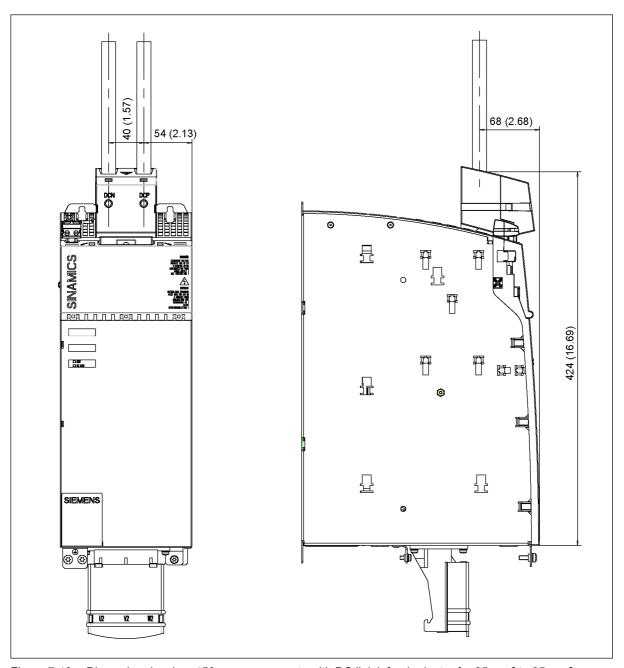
Dimension drawing, 150 mm components with DC link infeed adapter for 35 mm² to 95 mm²
